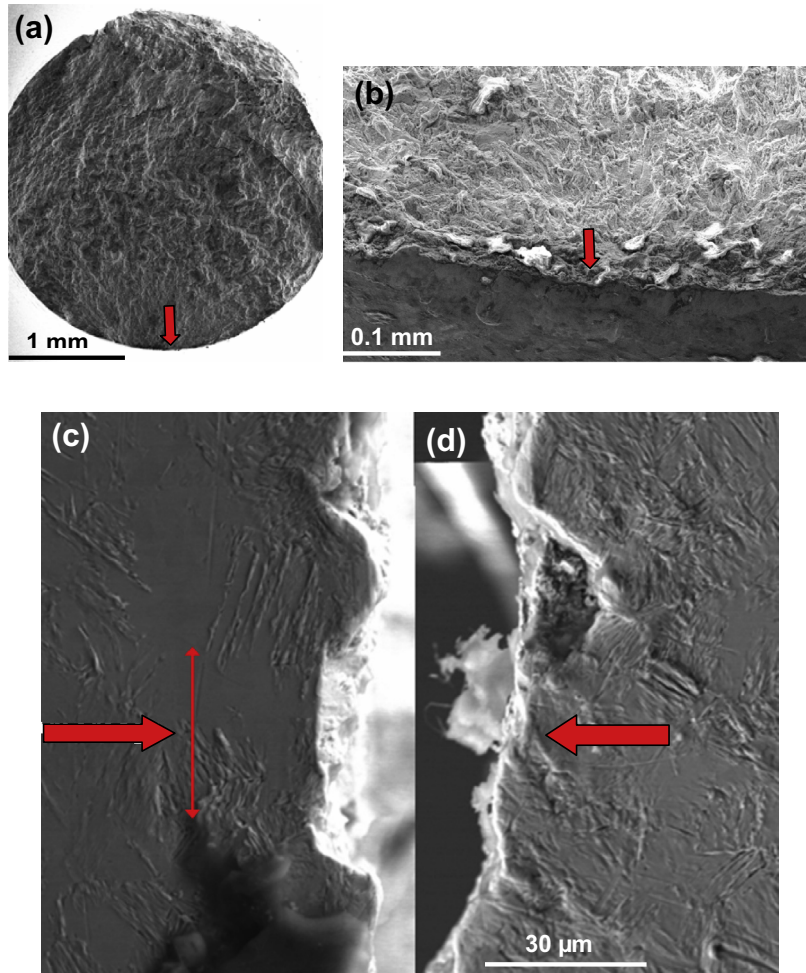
Fracture specimen at stress amplitude of 105 MPa; $N = 3.1 \times 10^7$ cycles – (a) fracture surface: the crack initiation zone is indicated by the arrow, (b) zoom on the crack initiation zone, (c) specimen surface normal to the fracture, left side, zone free of slip bands, and (d) specimen surface normal to the fracture surface, right side, zone marked with slip bands.
